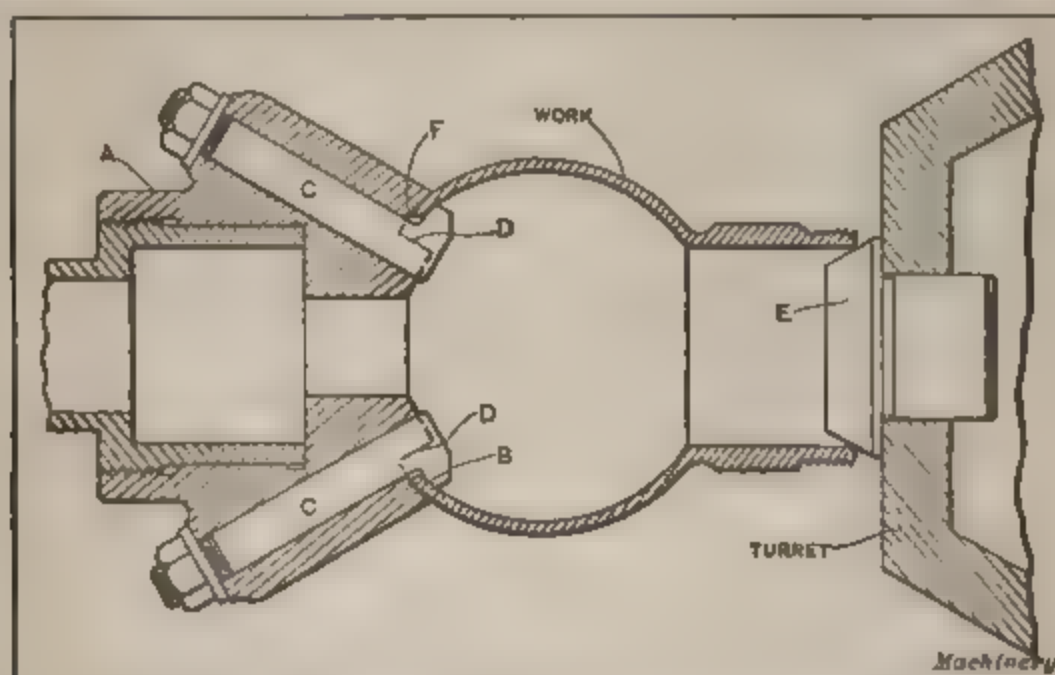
Fixture for Ball-and-socket Pipe Joint
